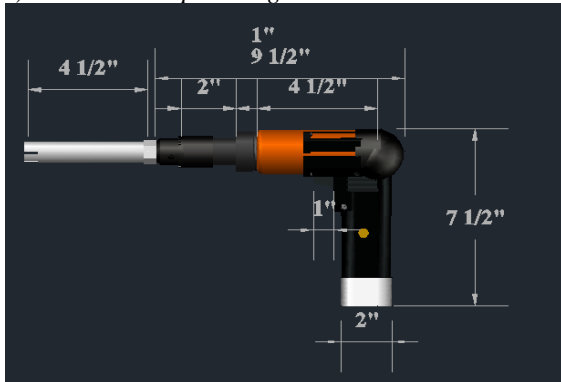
Side view of Tender coco punching tool AUTOCAD Drawing
